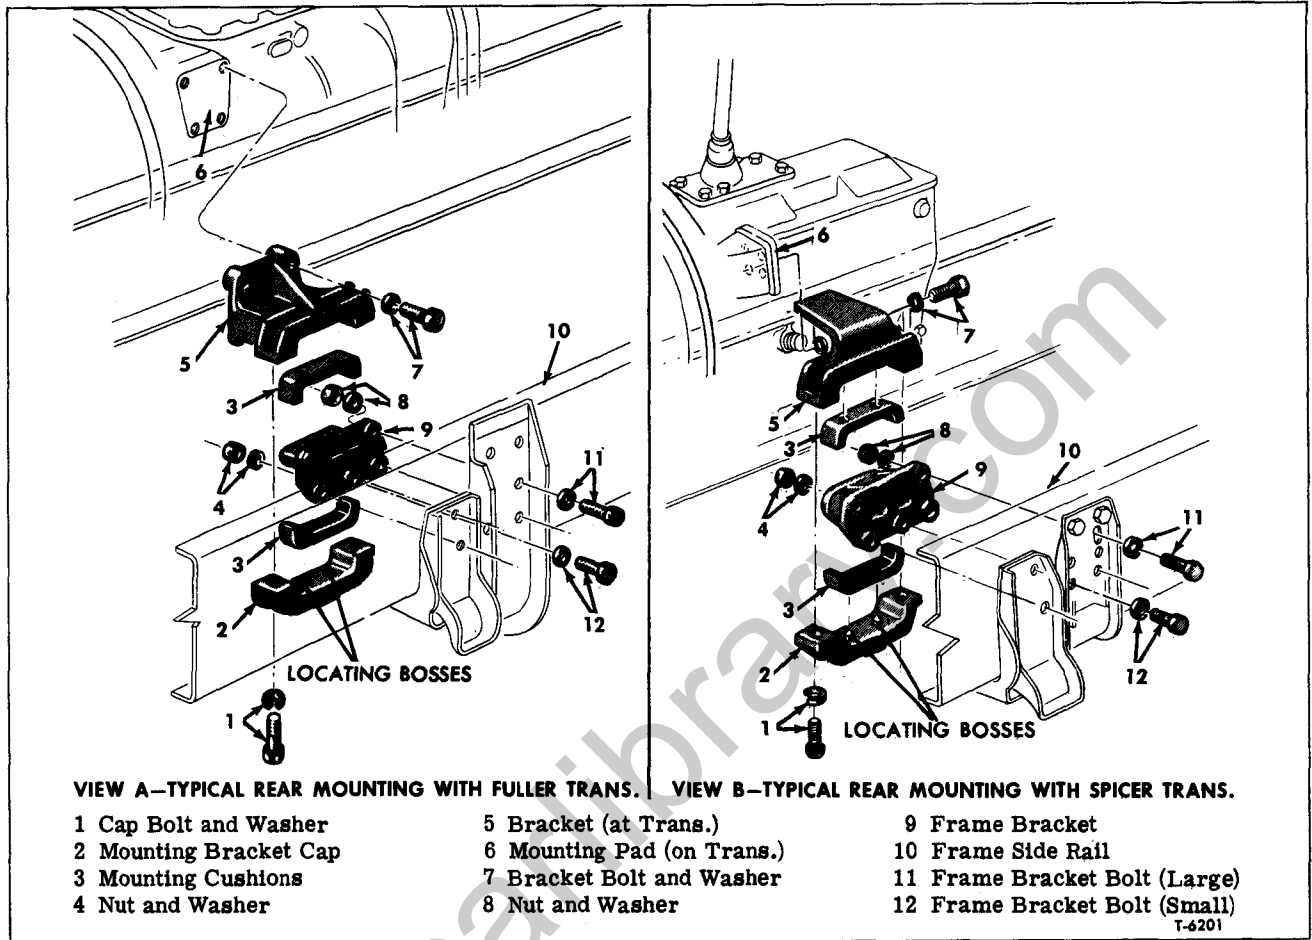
Trunnion Type Engine Rear Mountings (Typical)
